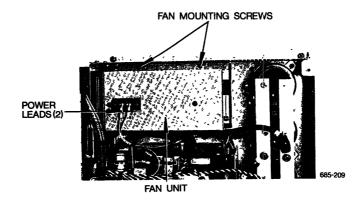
Cooling Fan Assembly of Model CIMR-18.5 B, 200 V, 25 kVA
